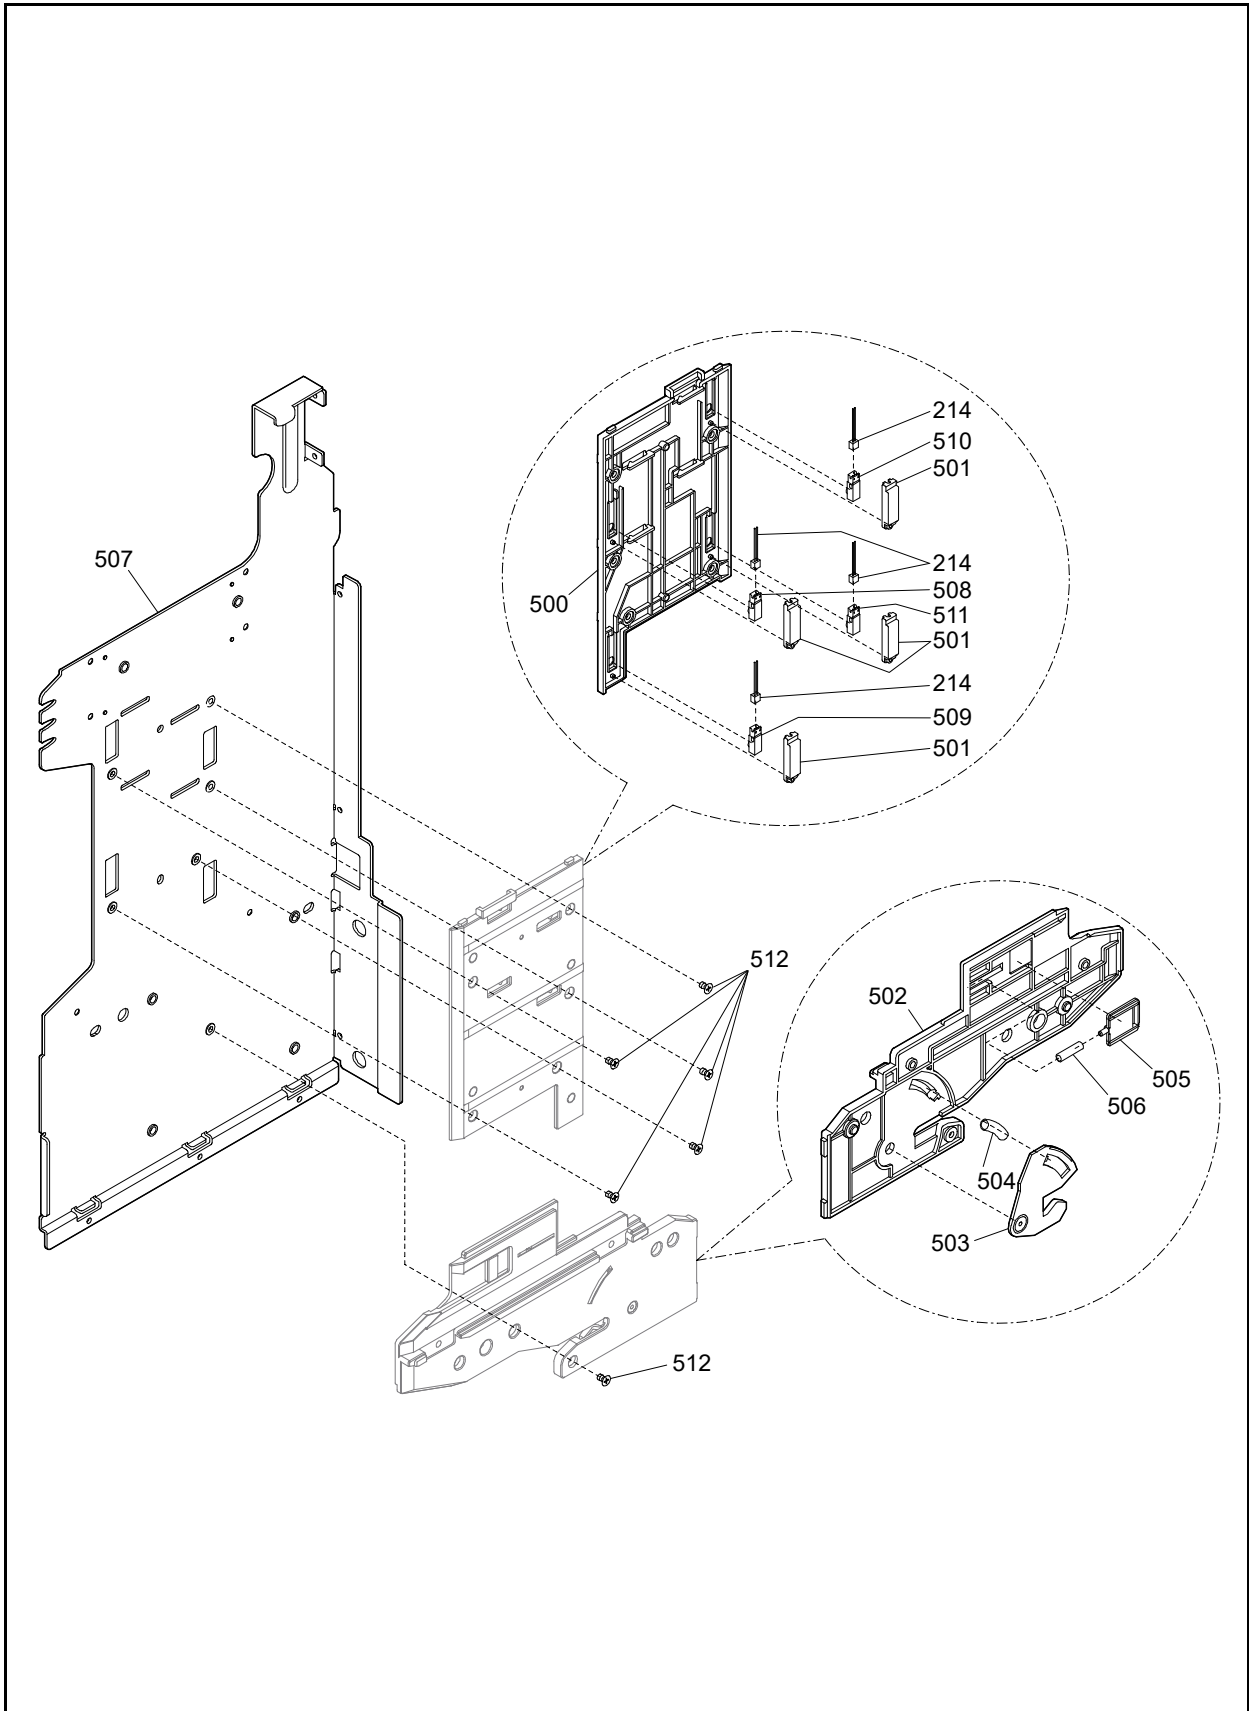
iPRO-RC Frame Unit 5 Exploded View
